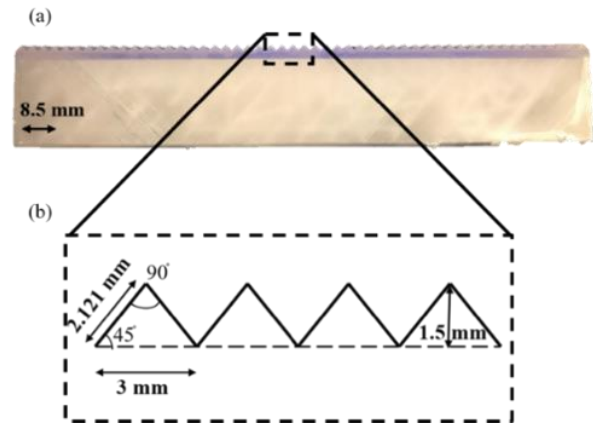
(a) 3D-printed resin mold base; (b) schematic of the saw-tooth geometry
